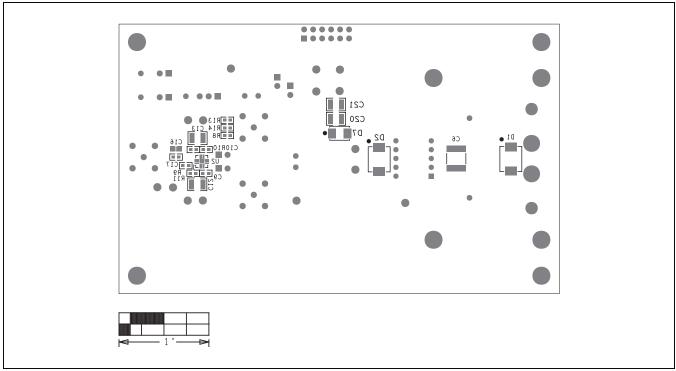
MAX44211 EV Kit Component Placement Guide—Solder Side
